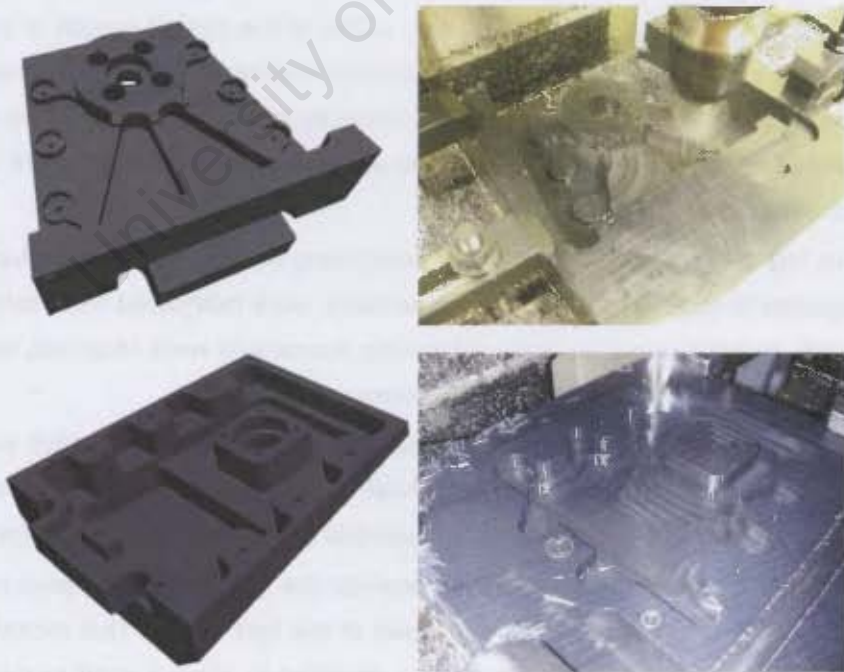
MACHINING OF TAIL UNIT COMPONENTS
